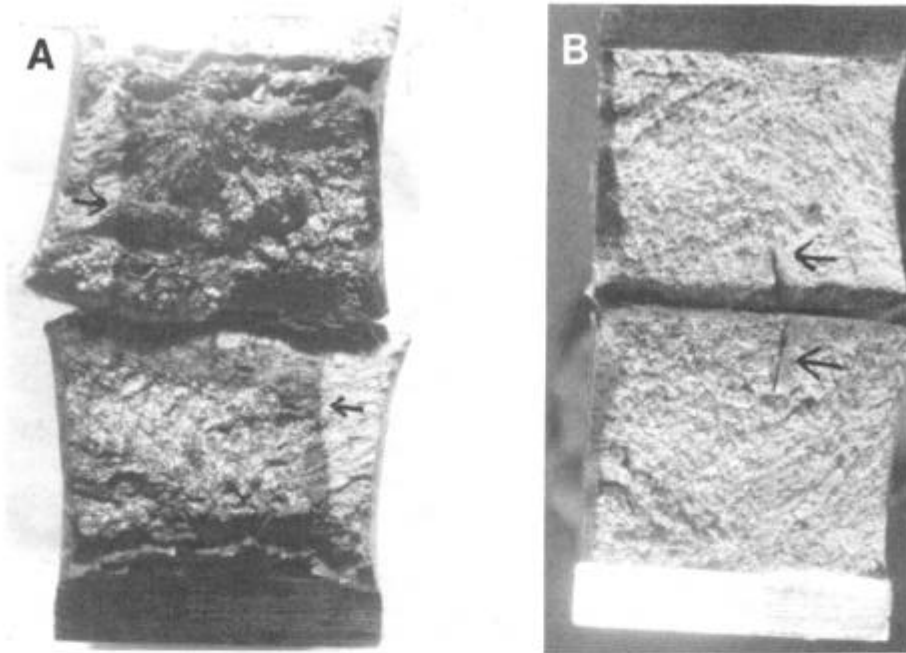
SEM images of fracture surfaces of Charpy samples of mechanical disbond tests in (a) Weld-clad and (b) HIP-clad.
